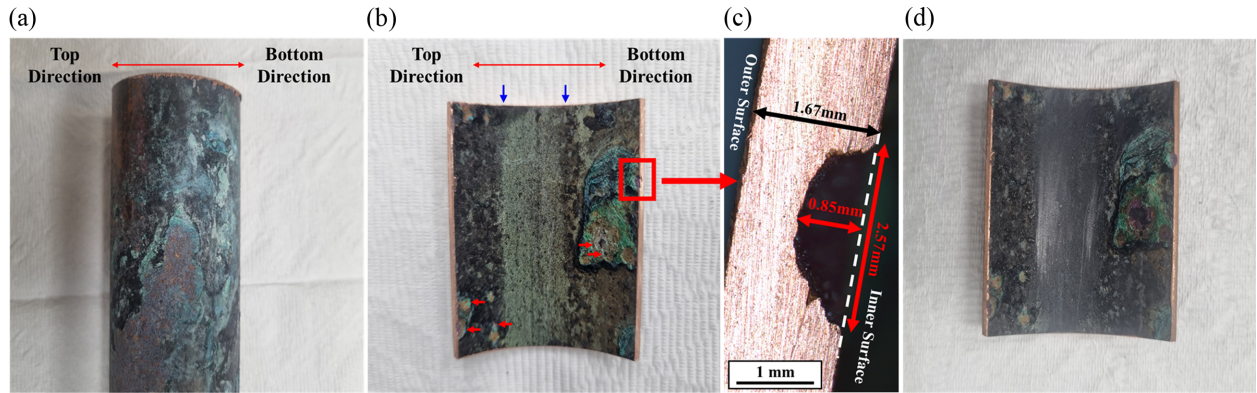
(a) Outer surface of the copper tube, (b) Inner surface of copper tube, (c) Cross-sectional view of pitting corrosion, (d) Specimen after removing corrosion products
